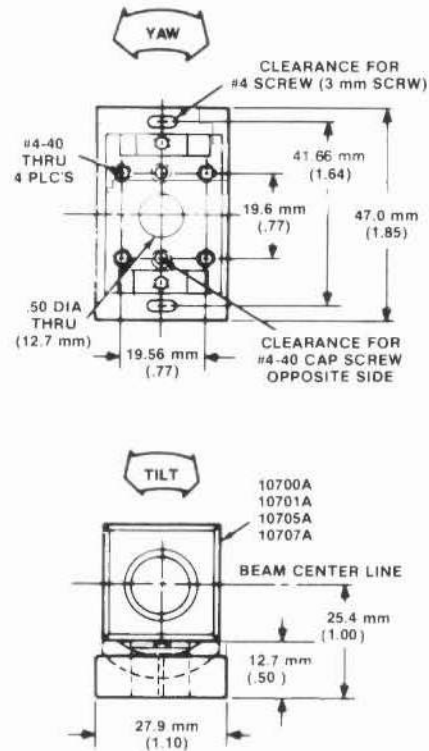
HP 10710A Adjustable Mount, Dimensions
